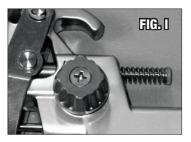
DETAIL PAINT GUN DISASSEMBLY FOR ADDITIONAL CLEANING OR REBUILDING
